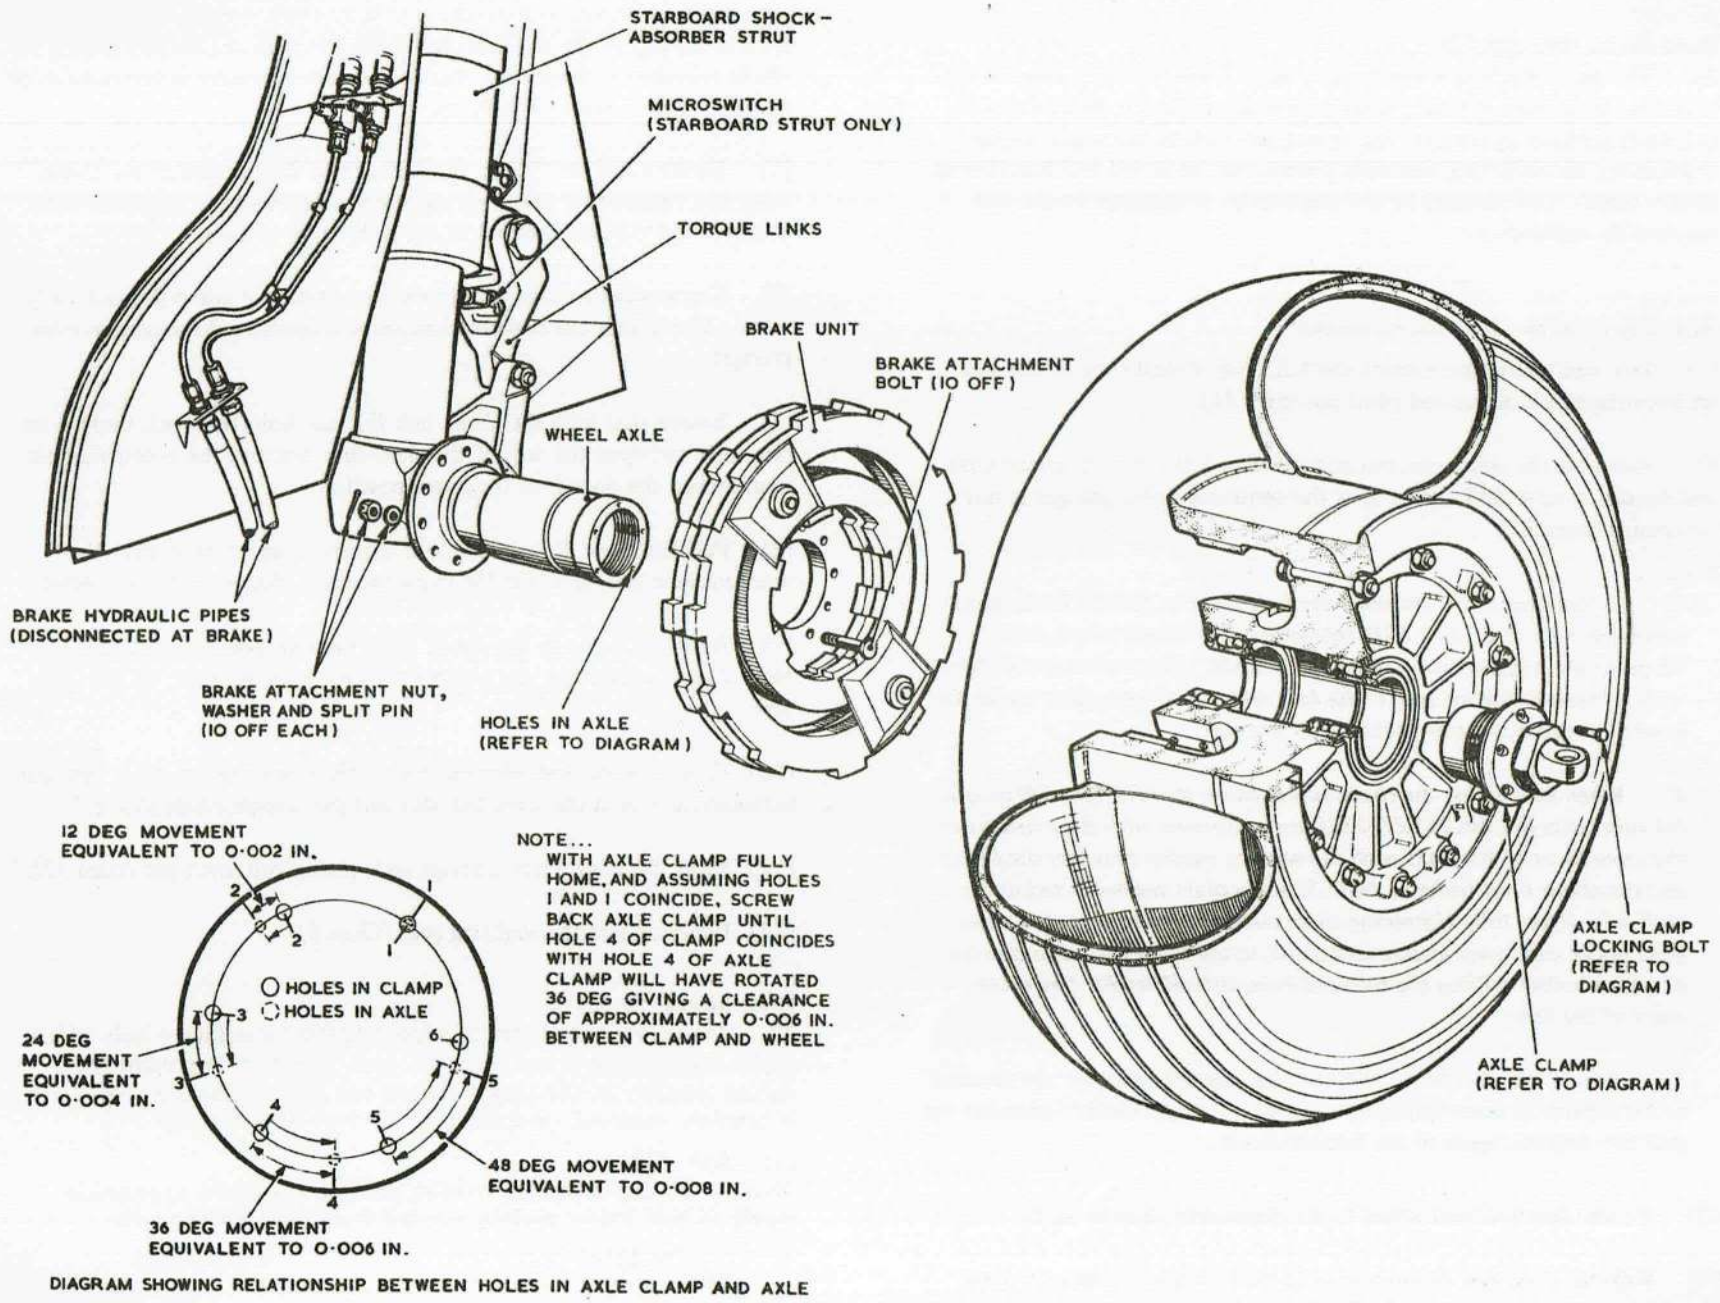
WHEEL AND BRAKE-REMOVAL AND ASSEMBLY
